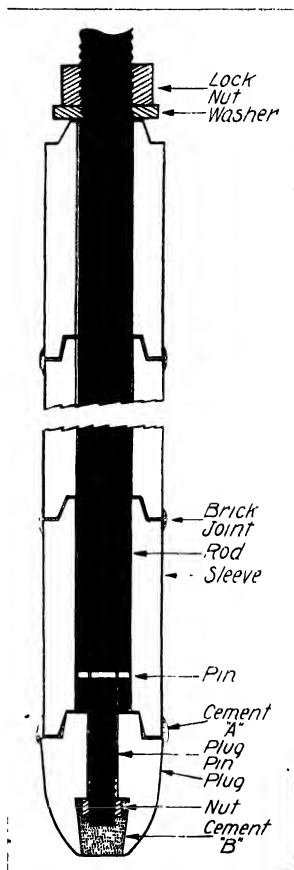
Stopper Rods are Built up of Hollow Refractory Sections Supported on a Central Rod and with the Joints Cemented
